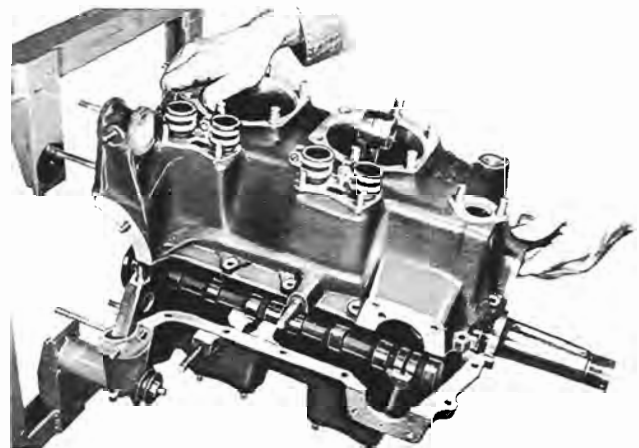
Installing Crankcase 1, 3 Side on 2, 4 Side.
